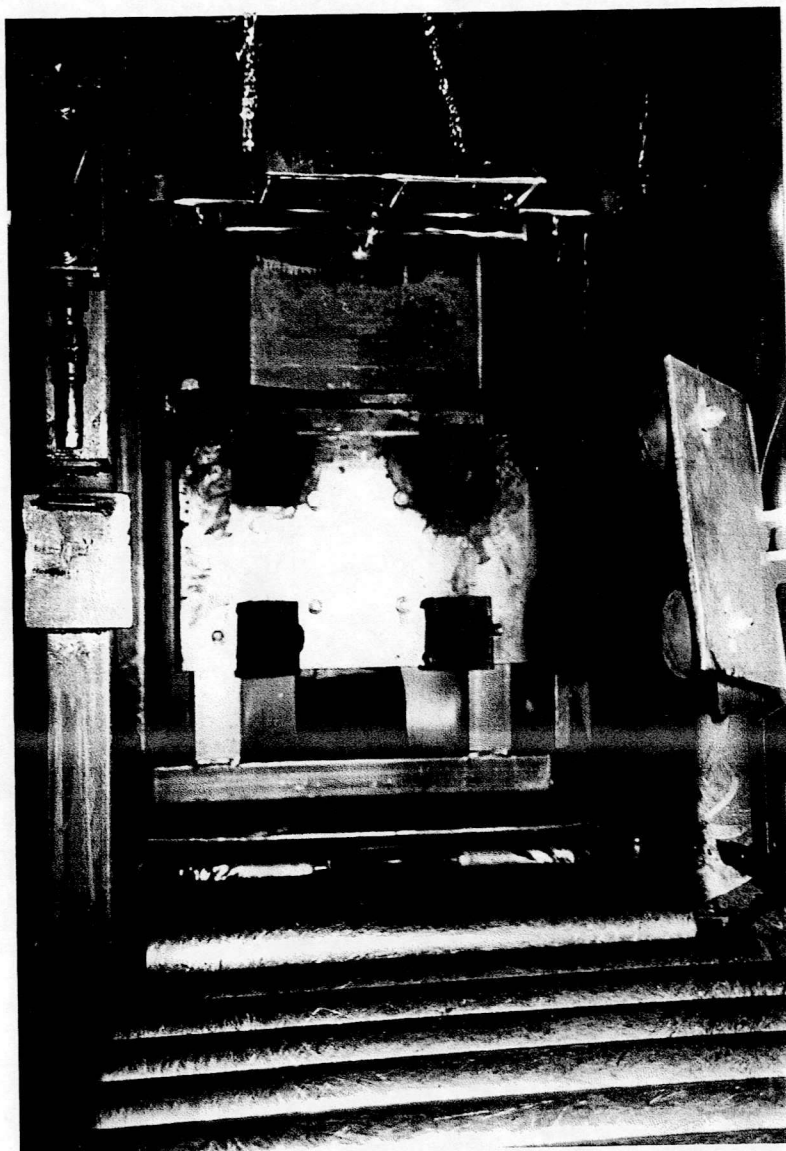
/9/95-A42 The rear of the barrel tilting machine looking along the roller conveyor towards the tilting platform. The safety doors are closed position.
